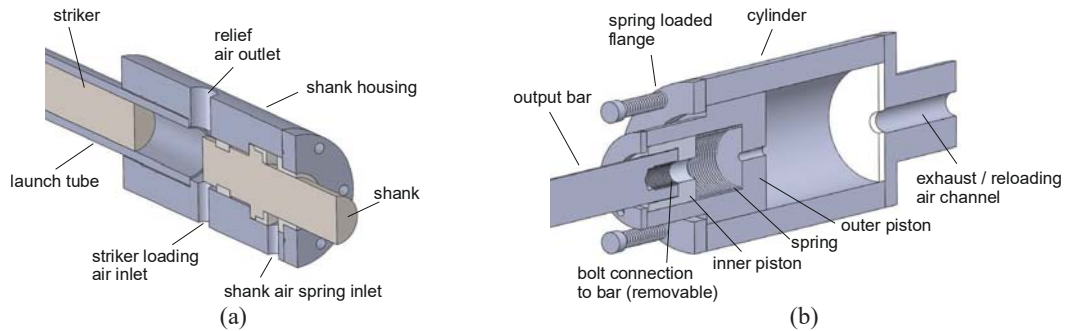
A CAD-model (cut section) of a) the shank used to pneumatically seal the launch tube end and to transmit the momentum of the striker to the input bar, and b) the pneumatic stopping/resetting-device. The specimen holder used in the test cases is shown in Fig. 4.
